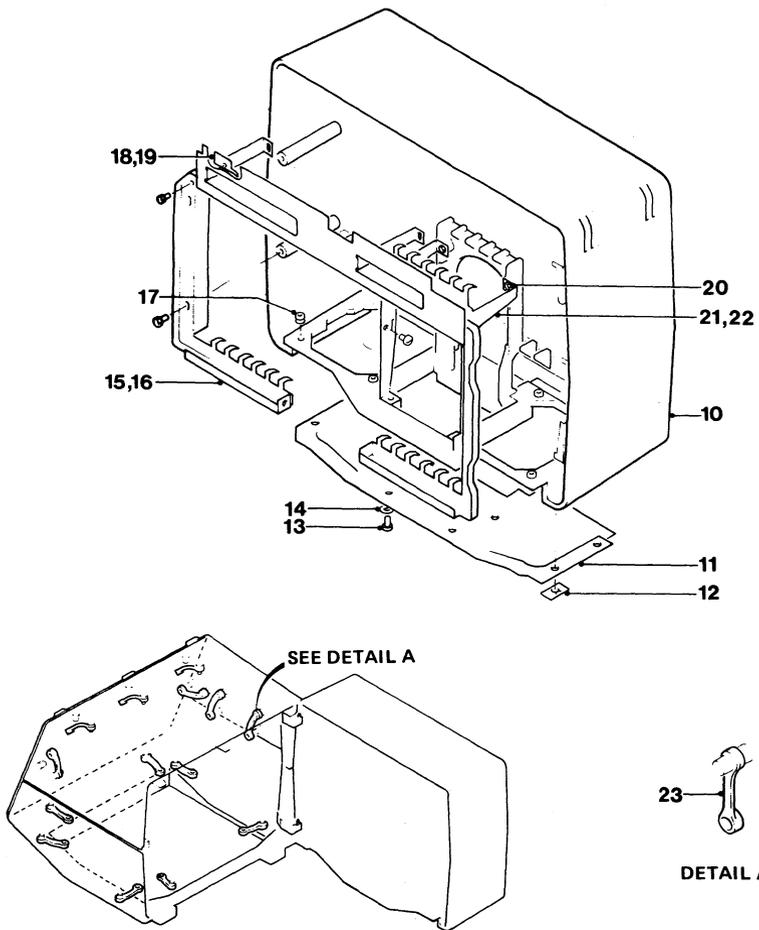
(Sheet 2 of 4). Rear Enclosure Assembly
